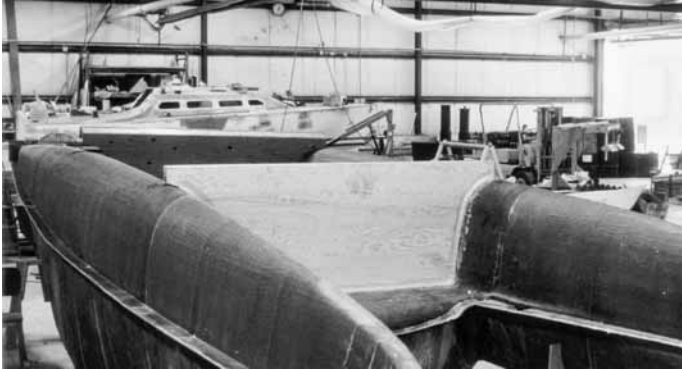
Framing is being added to the bottom mold after lay-up is complete.
